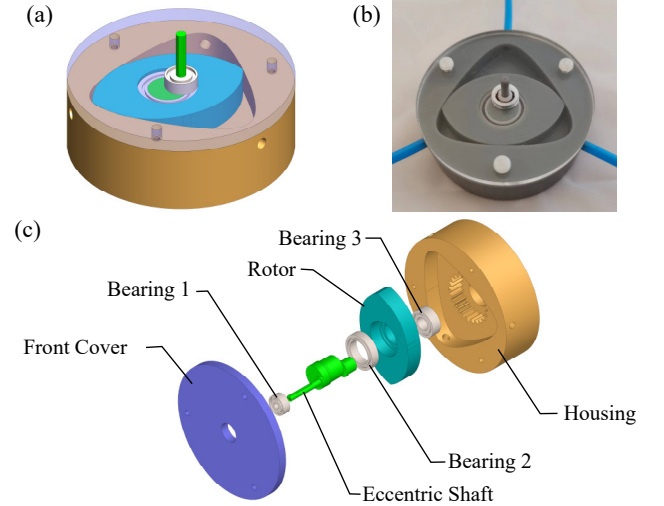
(a) CAD drawing of the stepper motor. (b) Photo of the motor. (c) Exploded view of the 3-chamber motor.
